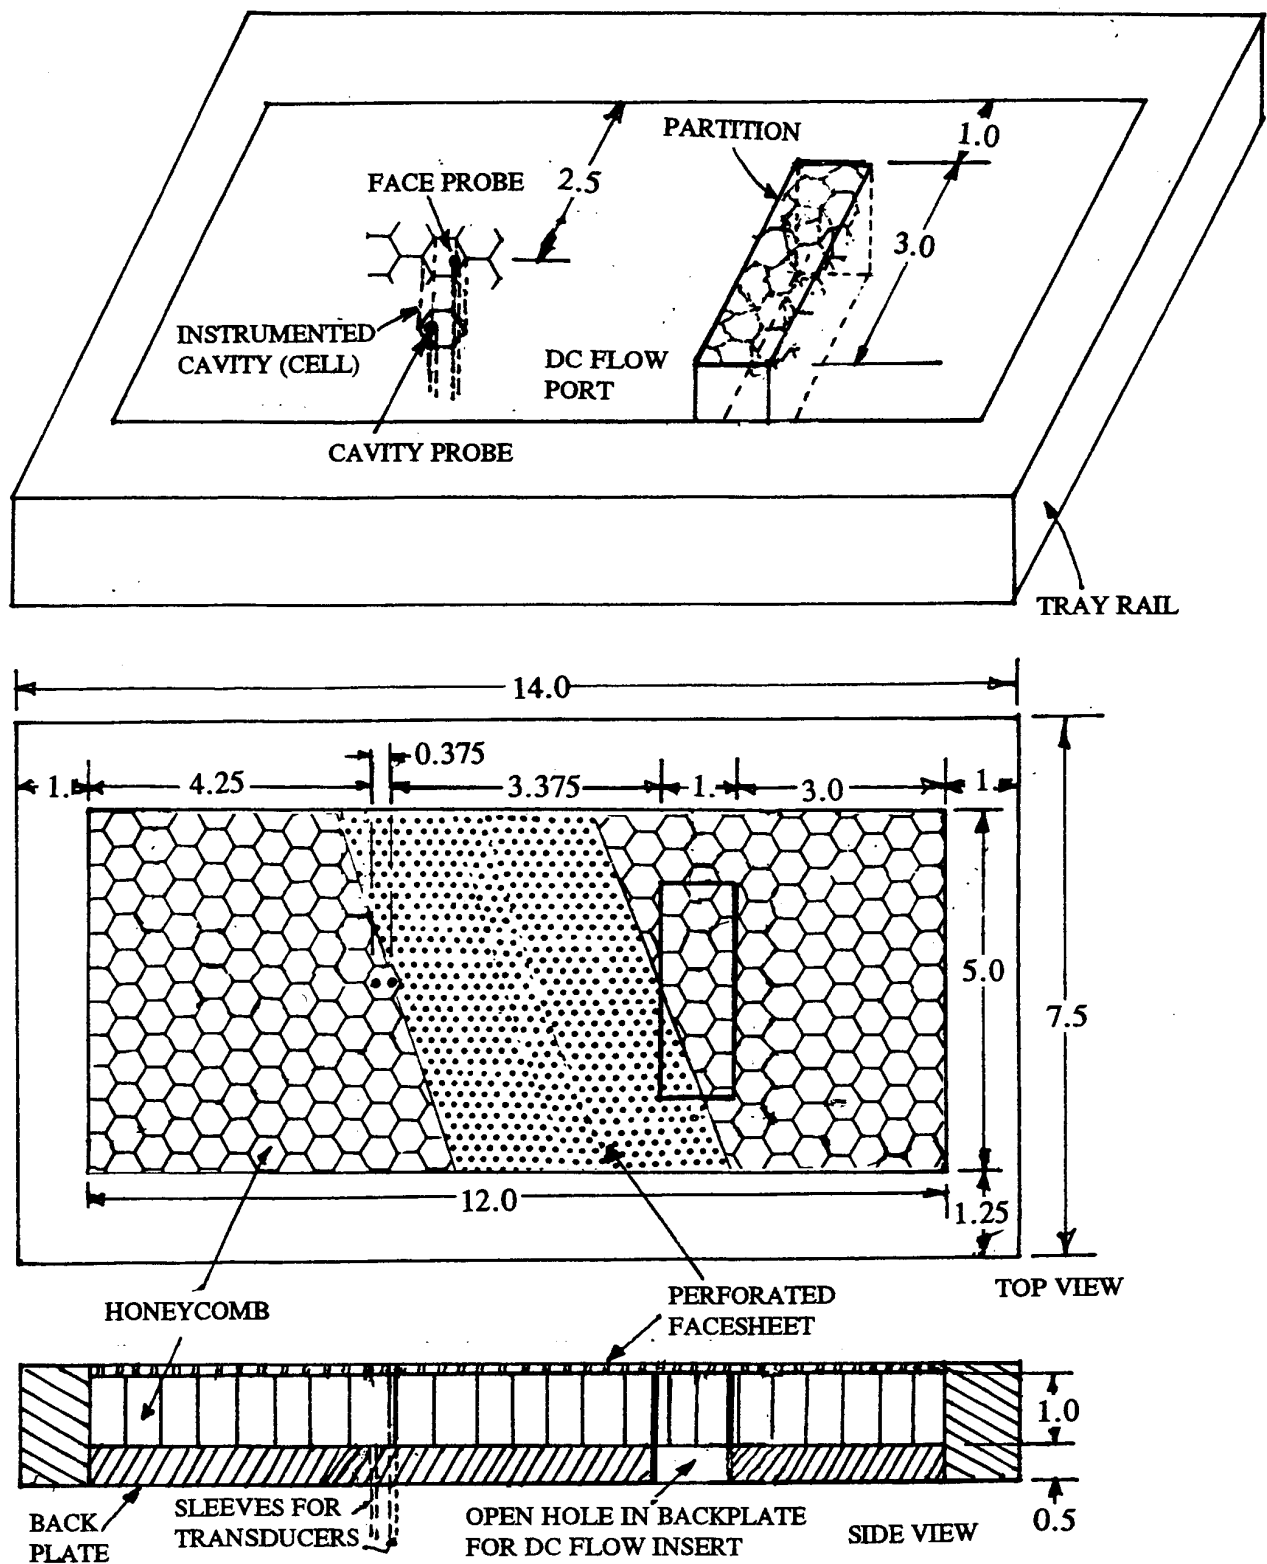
Instrumented perforated plate 1" deep (D) SDOF type panes for flow duct tests (all dimensions are in inches).
